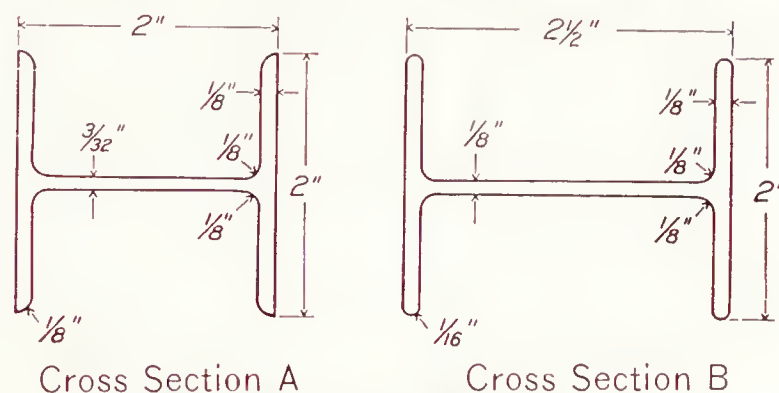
Dimensions of extruded 24S-T H-sections.
